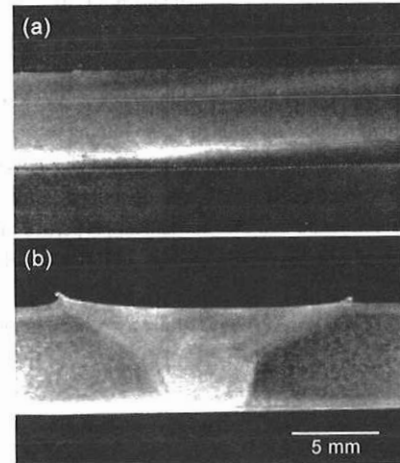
Optical micrograph of 6mm thick joint welded at a rotation speed of 600rpm and welding speed of 150mm/min : (a) surface appearance and (b) cross-sections perpendicular to the welding direction.
